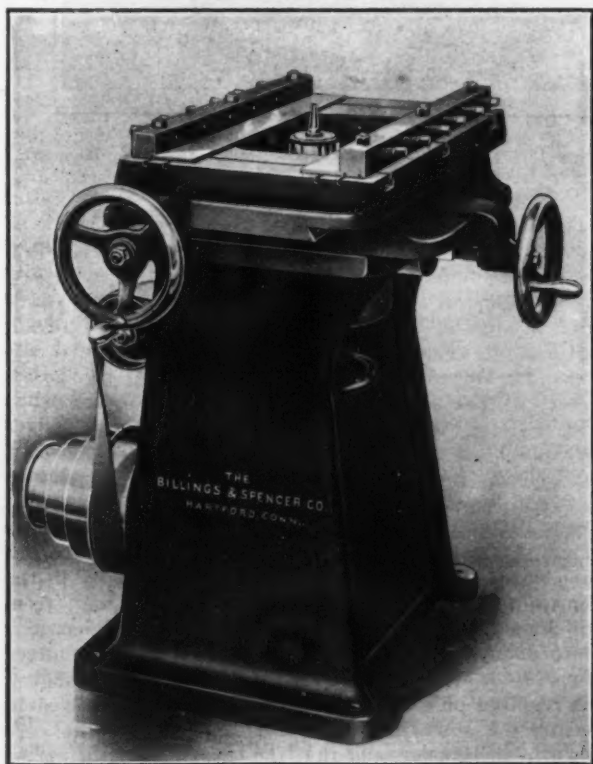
The New Billings & Spencer Miller for Trimming Dies.
